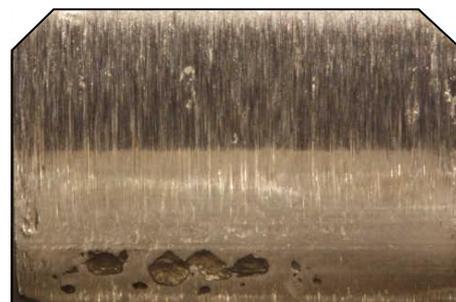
Pitting in the nonstandard involute gearing (HCR)
